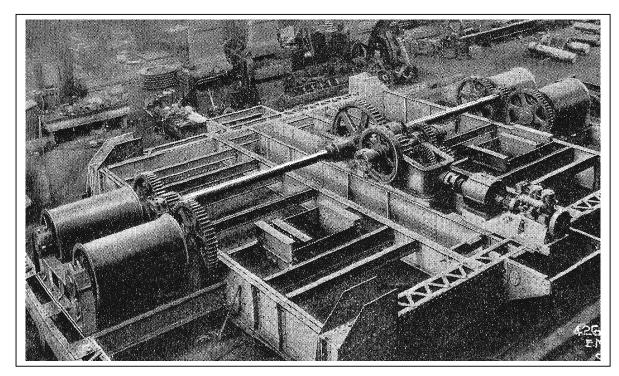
Columbia River Lifting Machinery Photograph. Similar to Portsmouth Machinery (Howard 1921)
